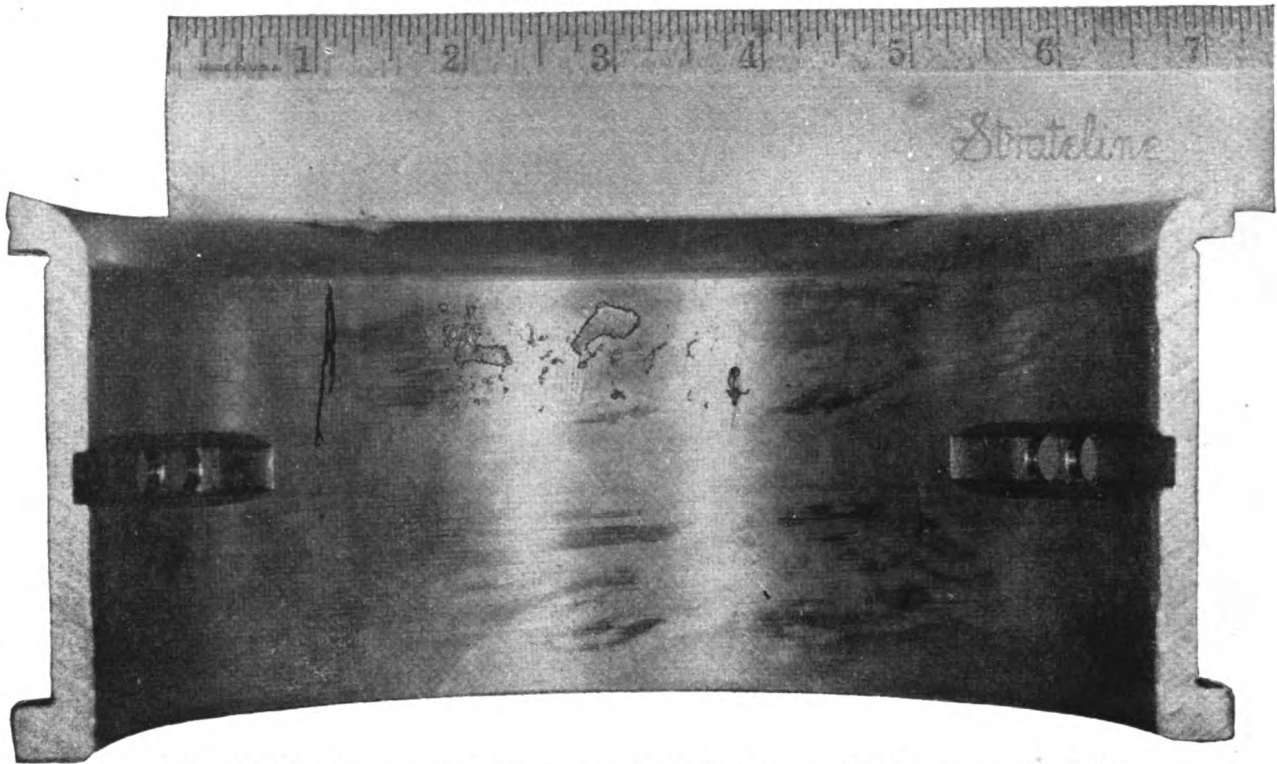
Bearing with ability to carry the load after part of the bearing area has failed.
